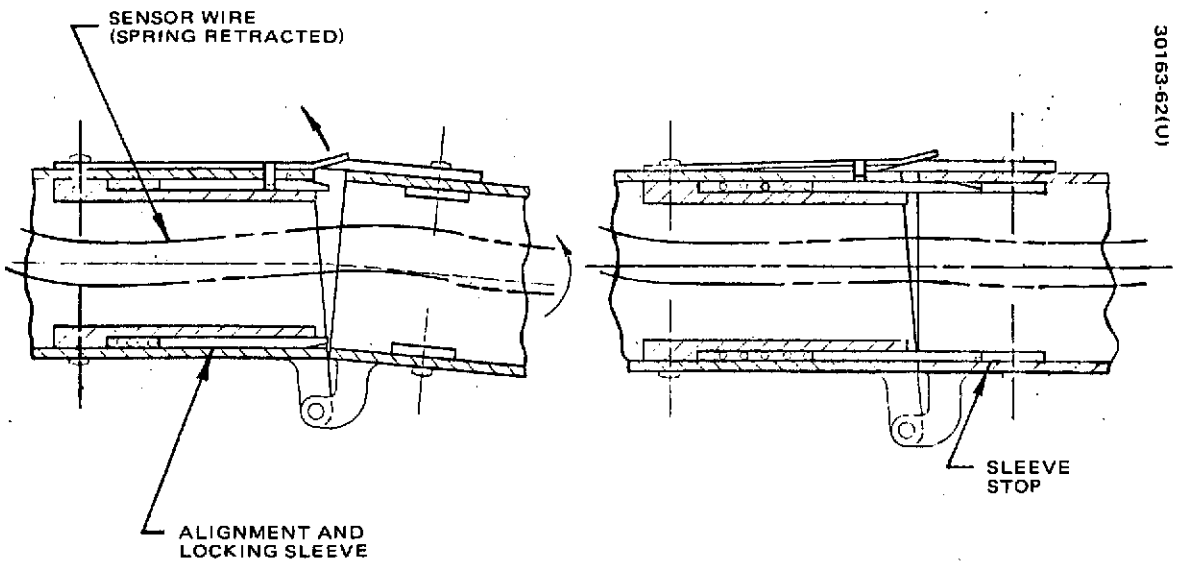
MAGNETOMETER BOOM ALIGNMENT AND LOCK MECHANISM
